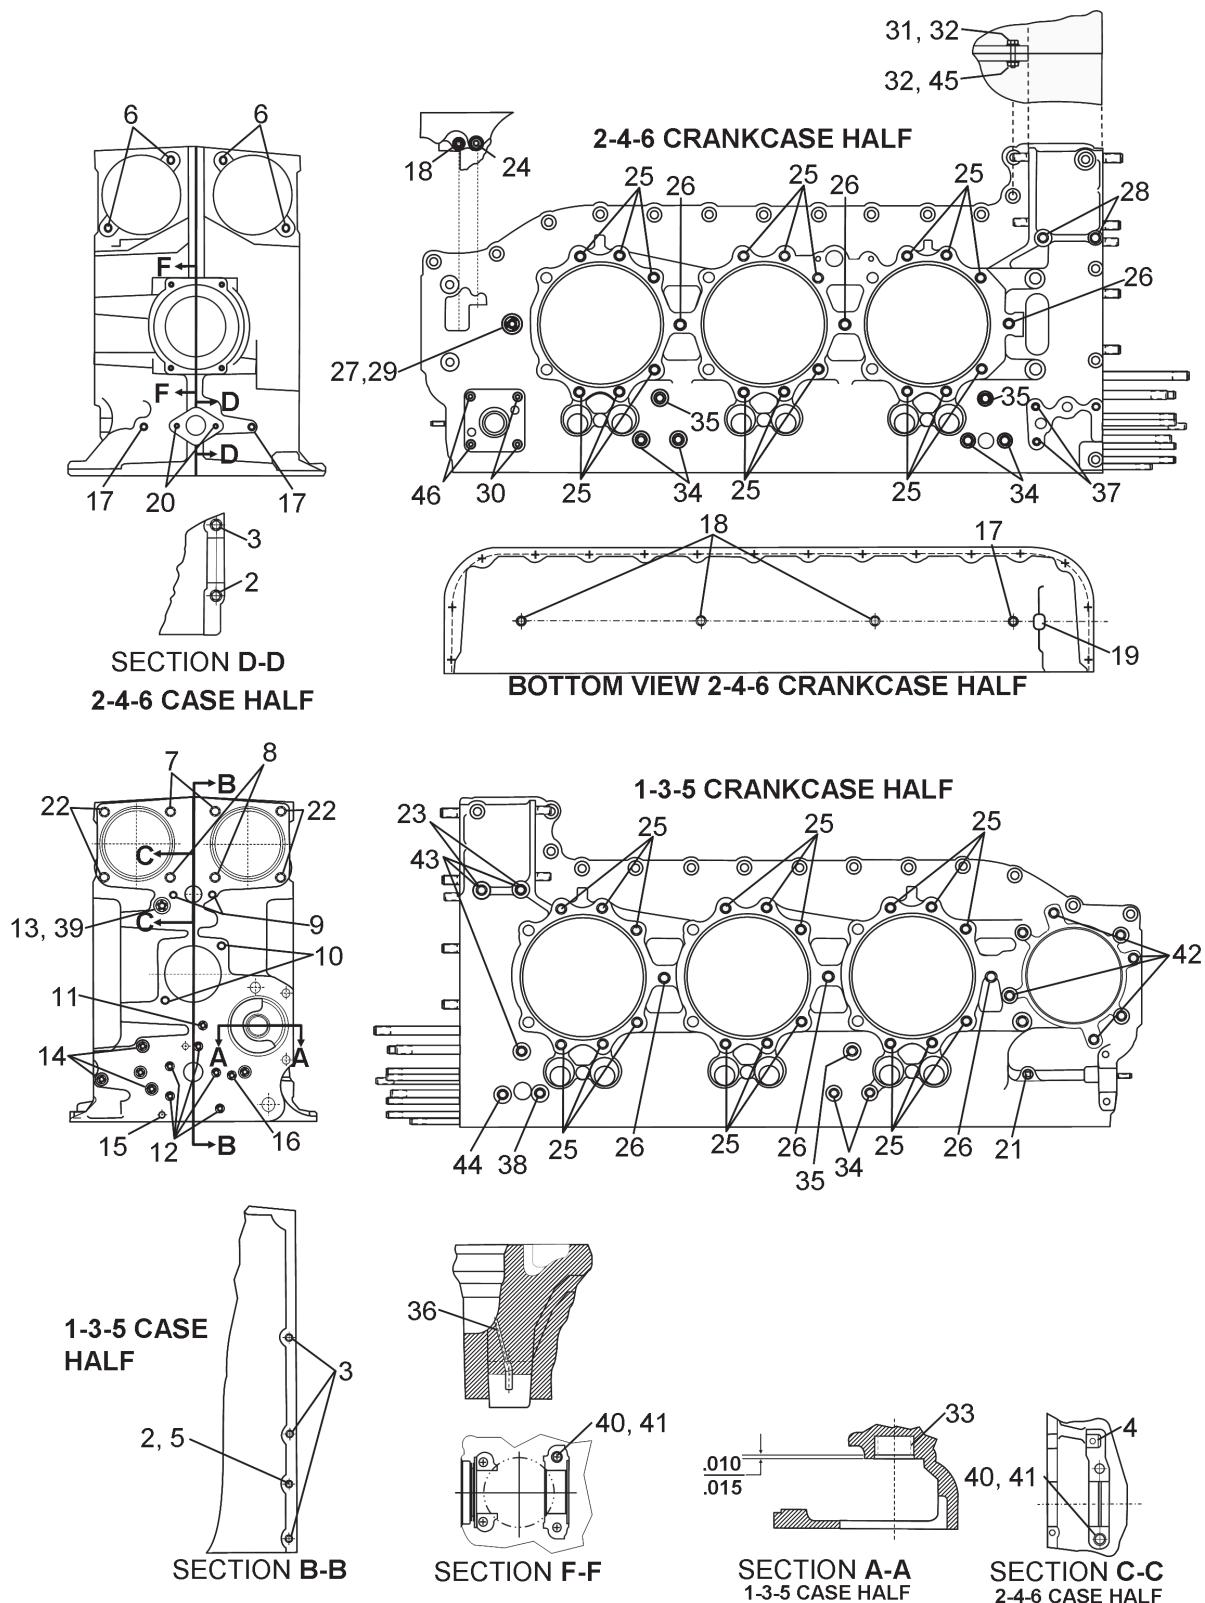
656619-16 & -18 Crankcase Stud Detail
